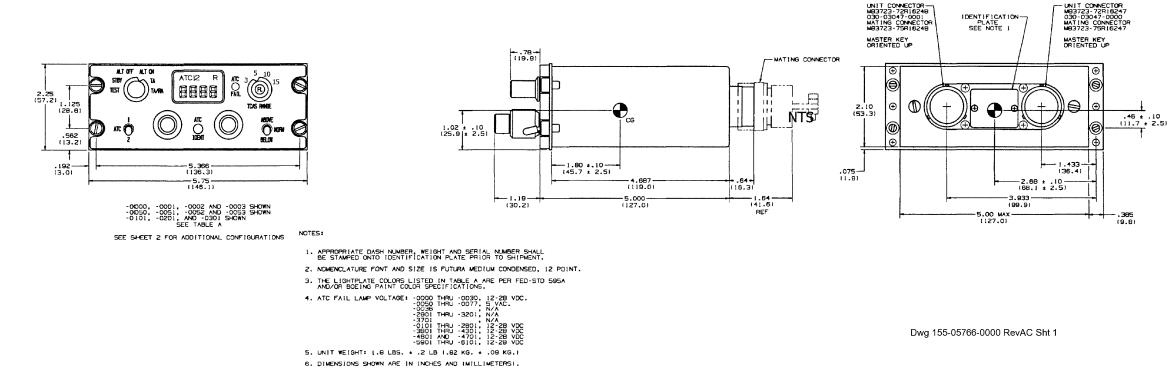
CTA-81A Mode S/TCAS Control Unit Outline and Mounting Drawing (Sheet 1 of 2) (Dwg. No. 155-05766-0000, Rev AC)
